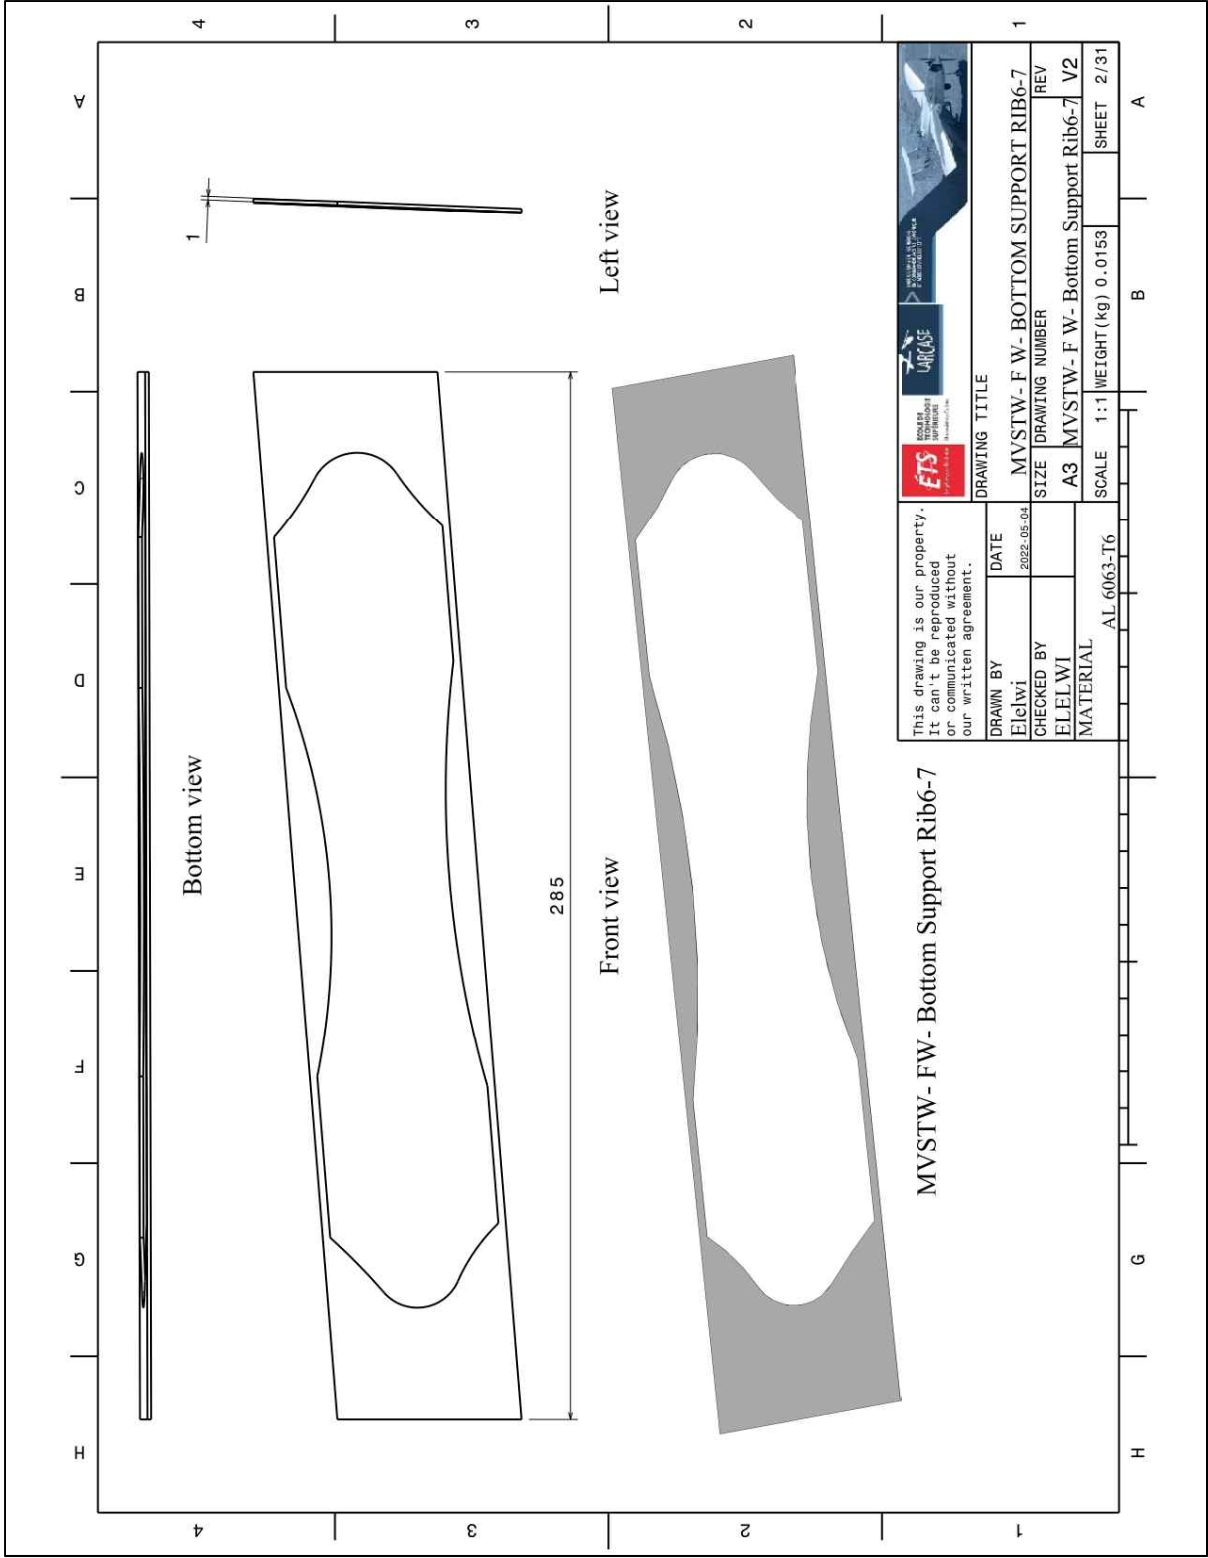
MVSTW Fixed Wing Bottom Support Rib 6-7 Using Al 6063-T6
